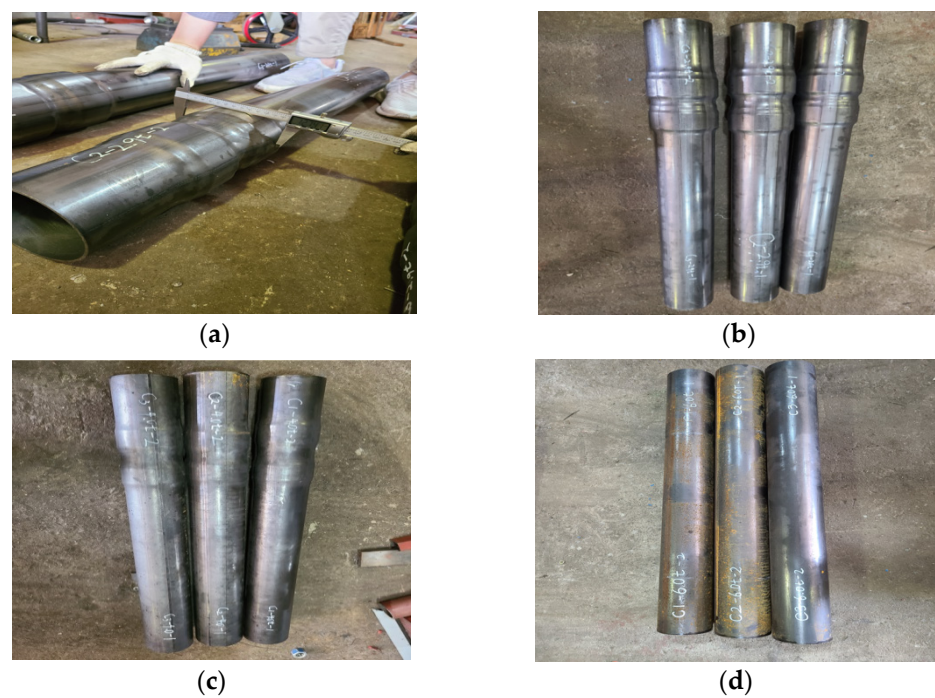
Specimens of steel pipe after expansion process depending on thickness: (a) Measurement of expanded steel pipes; (b) Steel pipe with 2.9 mm thickness; (c) Steel pipe with 4.0 mm thickness; (d) Steel pipe with 6.0 mm thickness.
